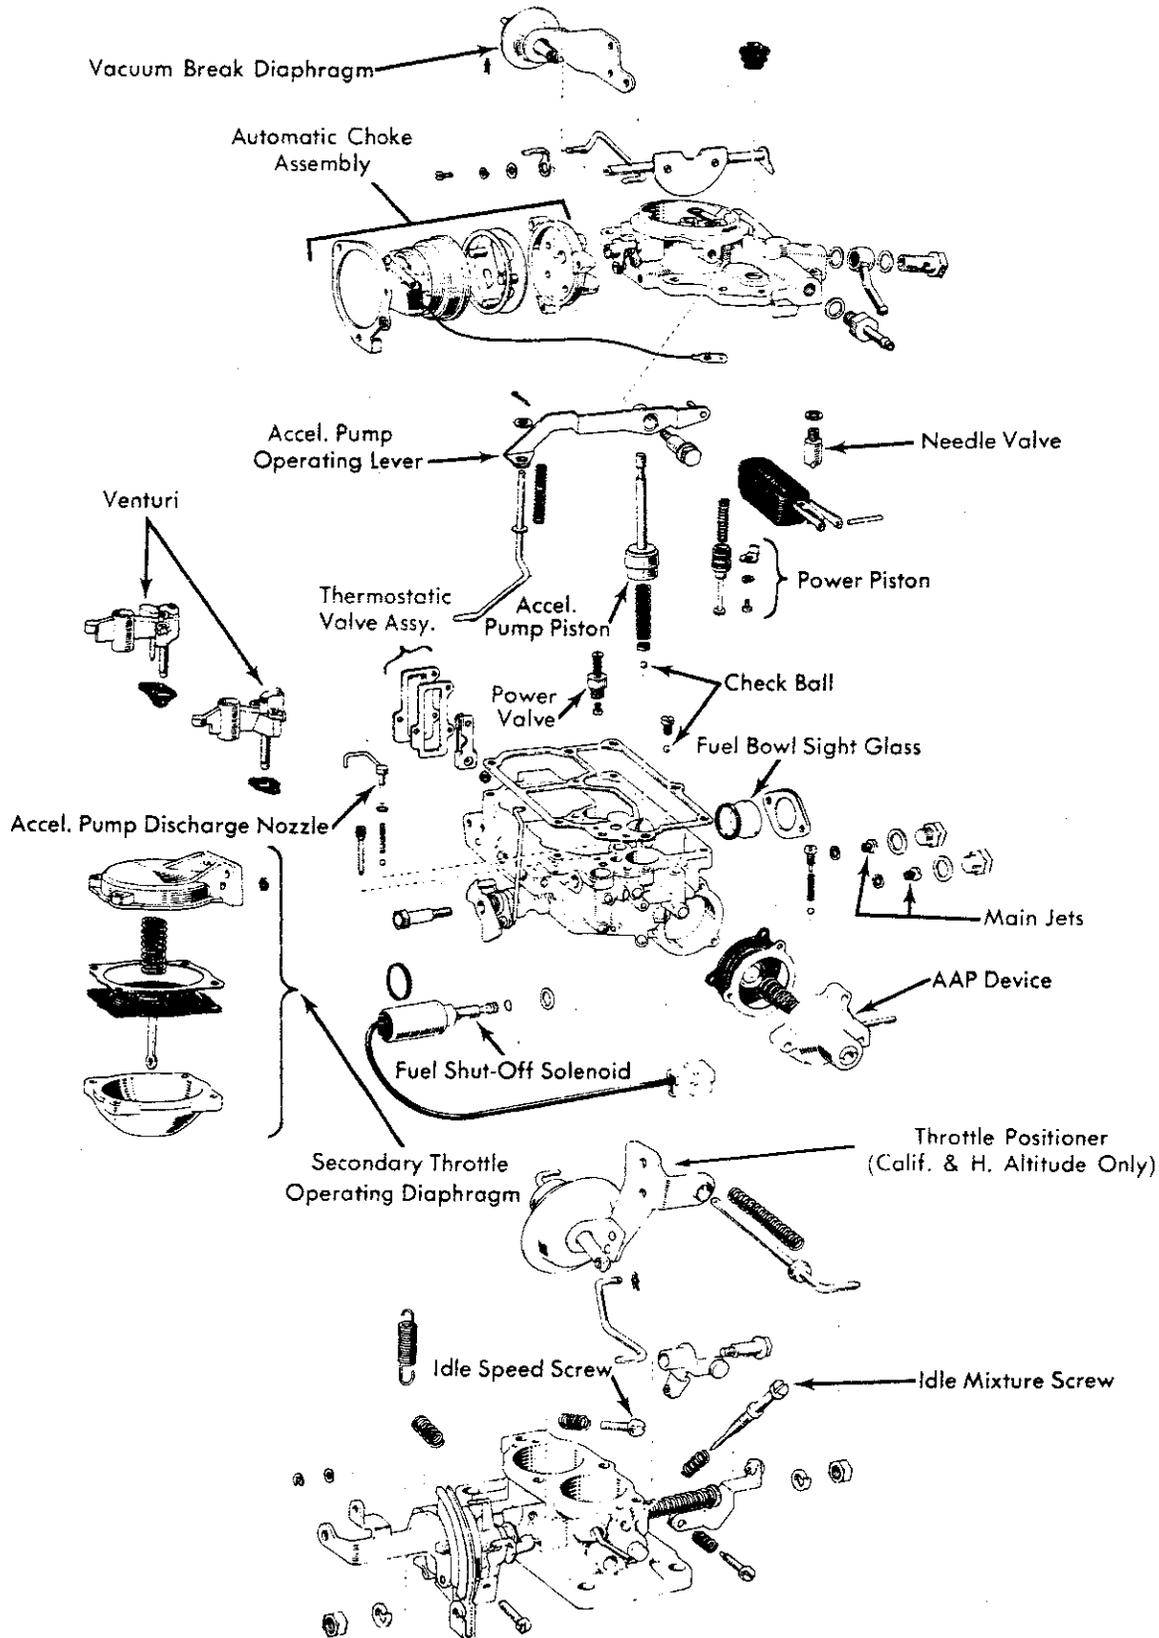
Carburetor Assembly for Toyota 2T-C Engine
